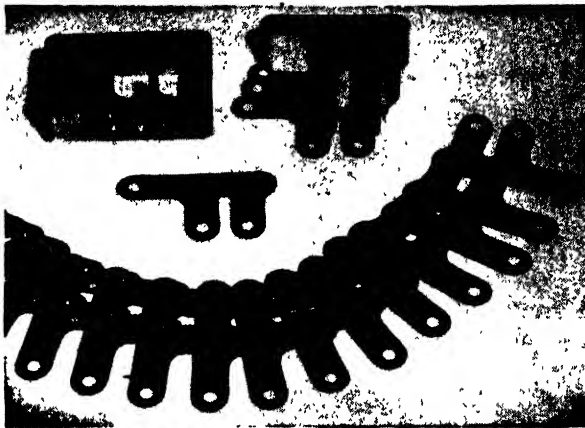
Sawing Short-run Sheet Metal Parts.
